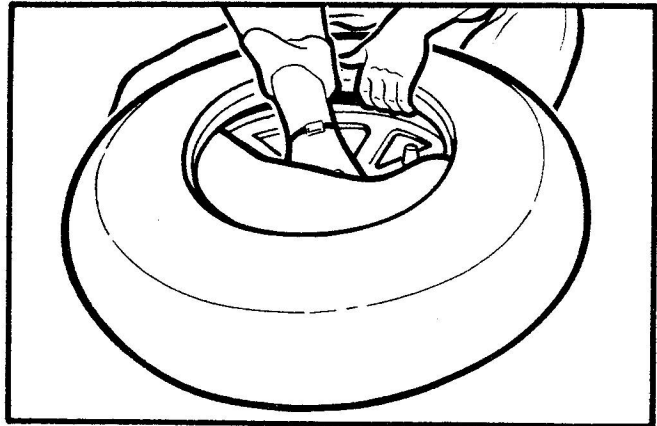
Positioning Tube to Insert Valve in Valve Hole
